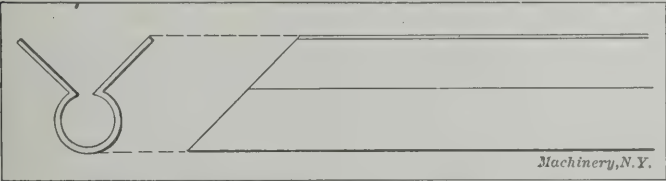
Corner Piece formed by the Die shown in Fig. 1
